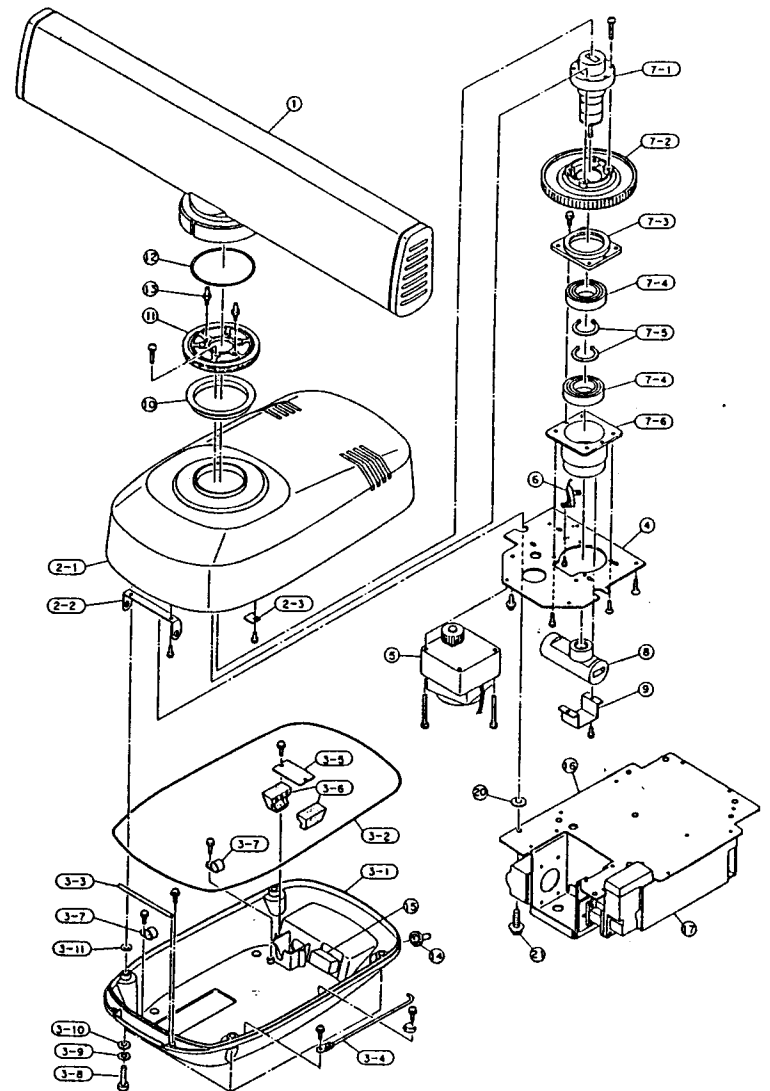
ASSEMBLY DRAWING OF R11X OPEN ARRAY SCANNER UNIT 1 OF 2
